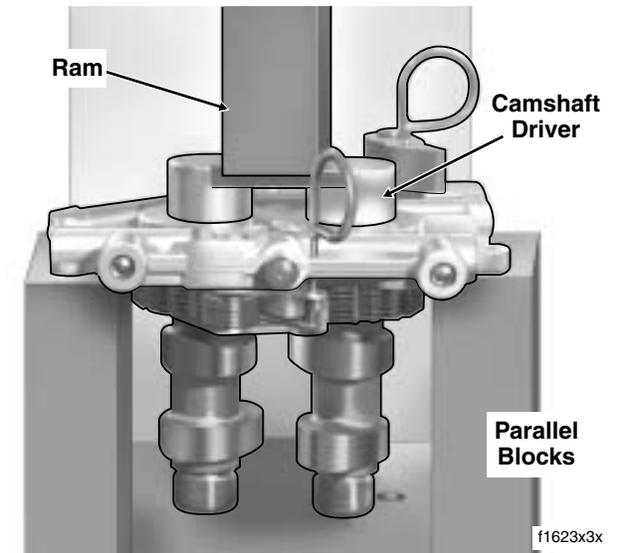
Camshaft/Camshaft Bearing Remover/Installer (Part No. HD-43644)
